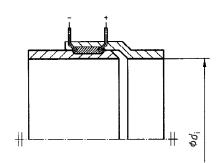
Socket for resistance welding for DN 300 or larger
